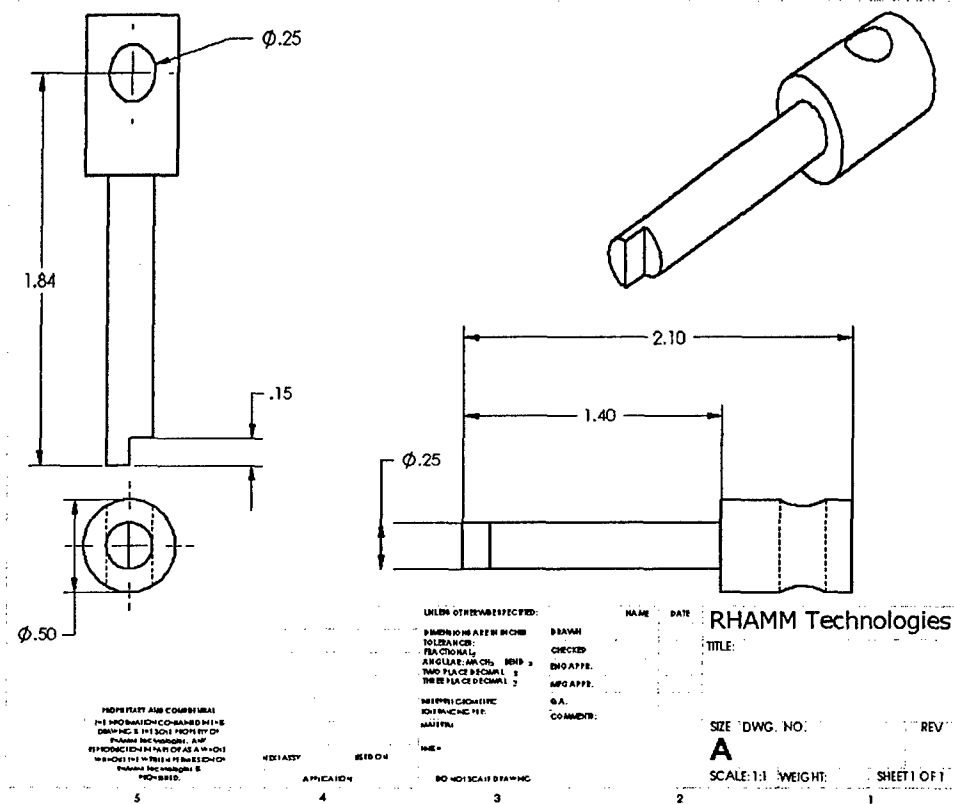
Drawing for DCB High Rate Experimental Apparatus: Turnkey.
